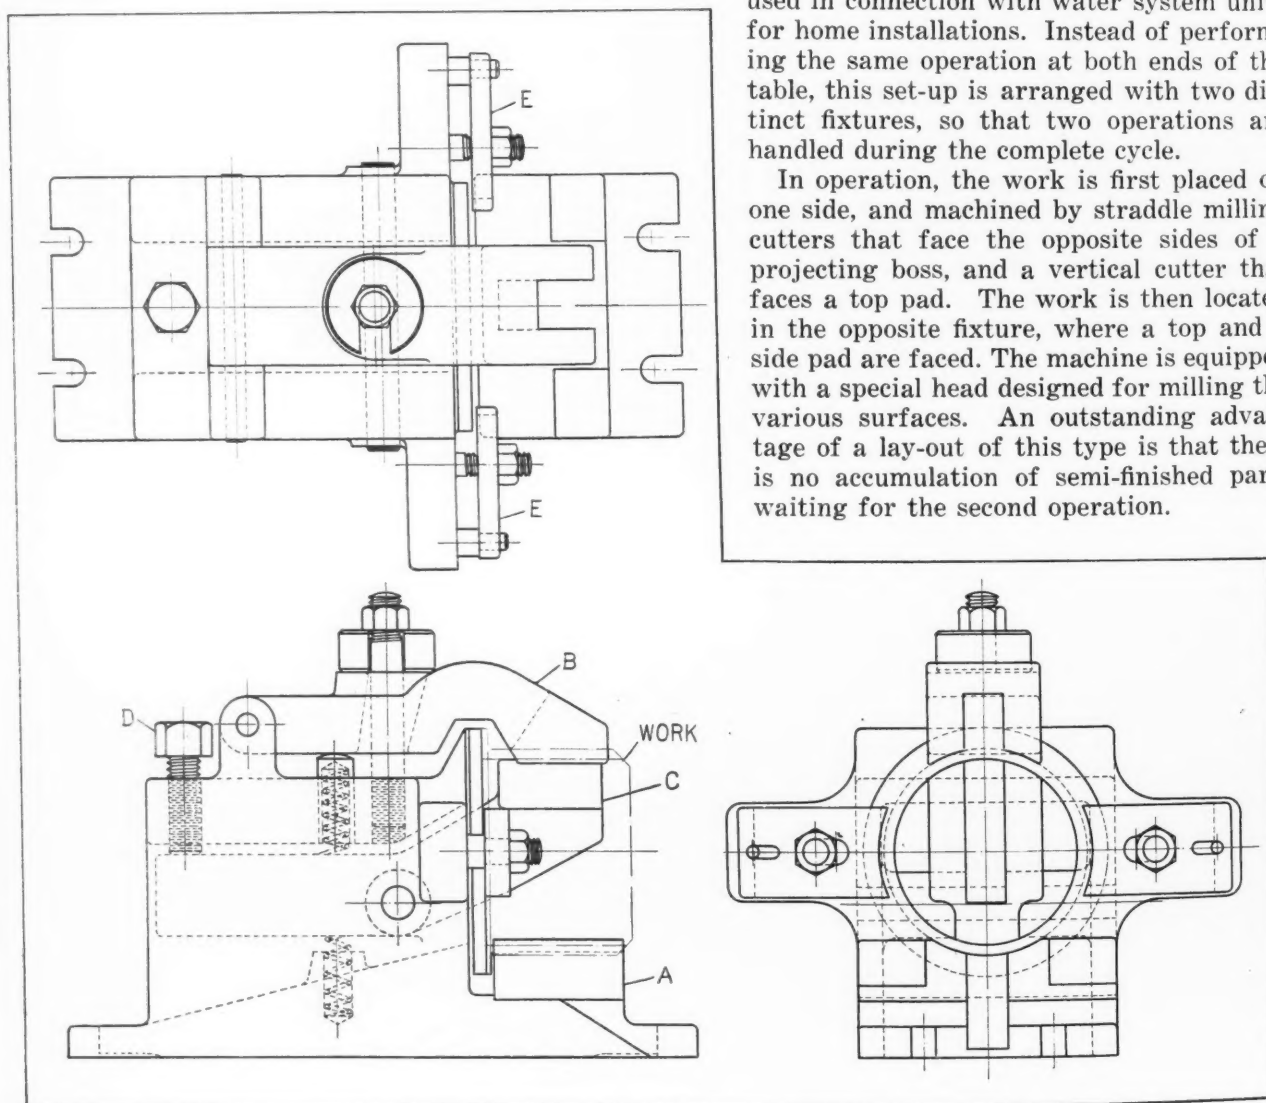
Assembly Views of Fixtures Shown in Fig. 7
